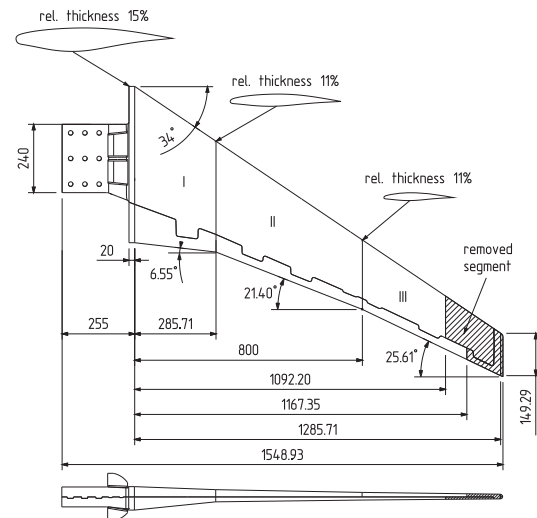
HIRENASD wing model geometry with marked removed wing tip
